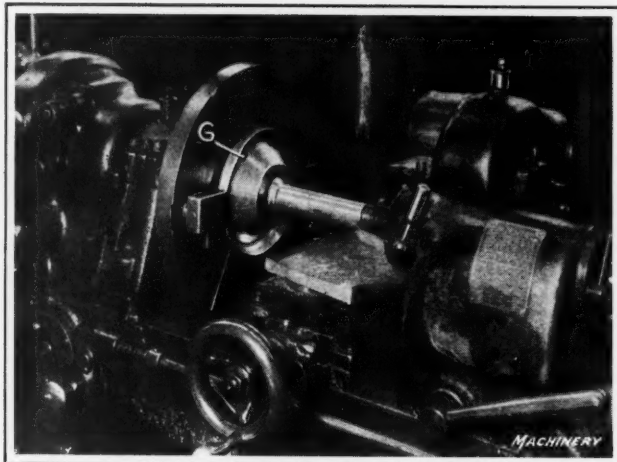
Thread Milling Machine employed in milling the Thread on the End of the Shaft
